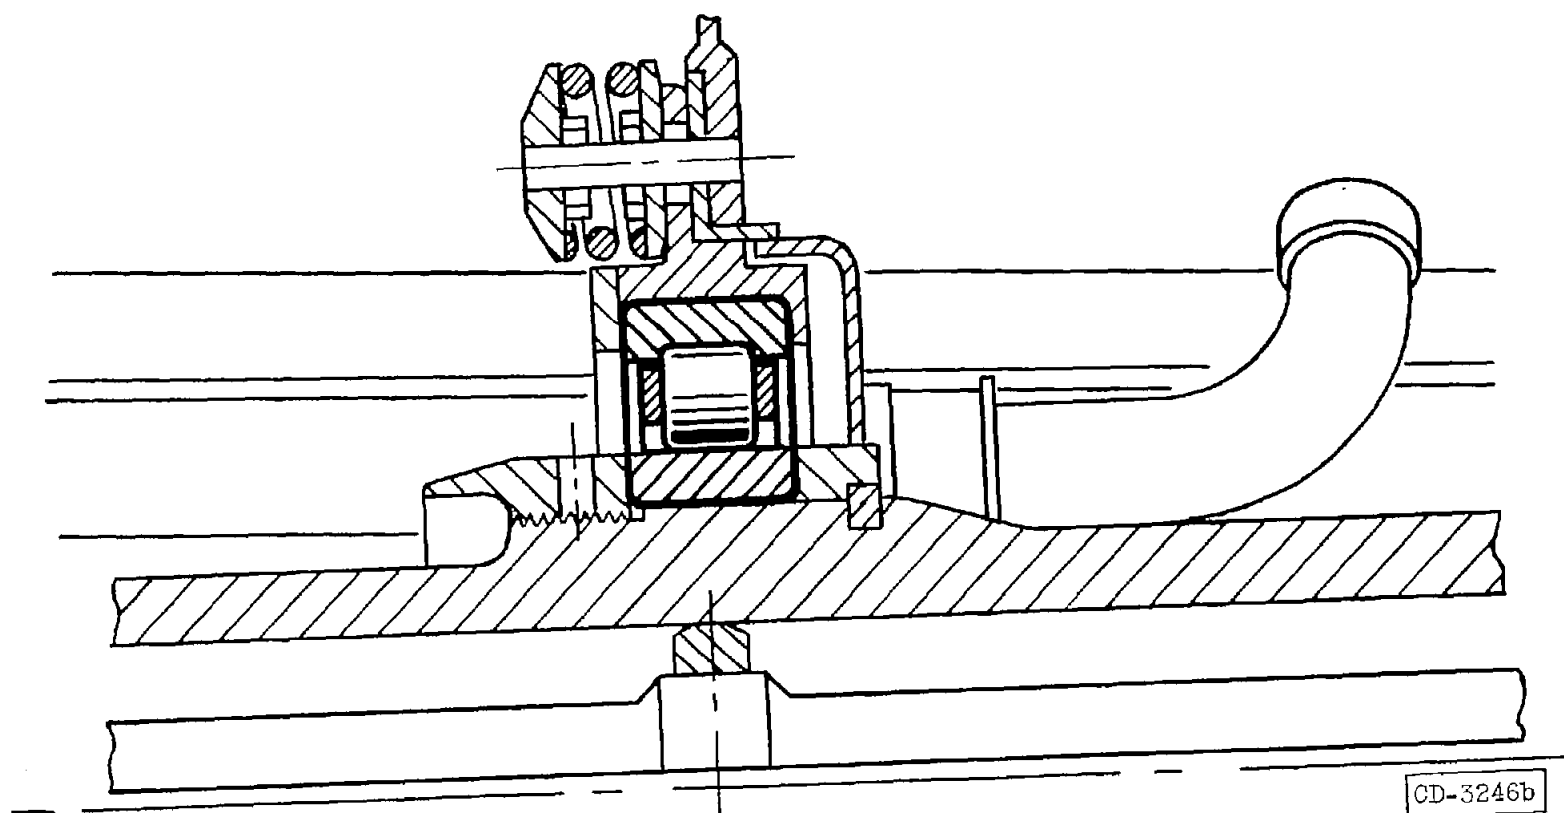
Typical mounting of turbine engine damper (idler) bearing.
